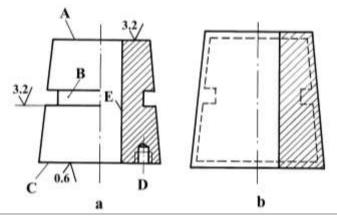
Drawing of a part to be cast (a) and casting (b)
